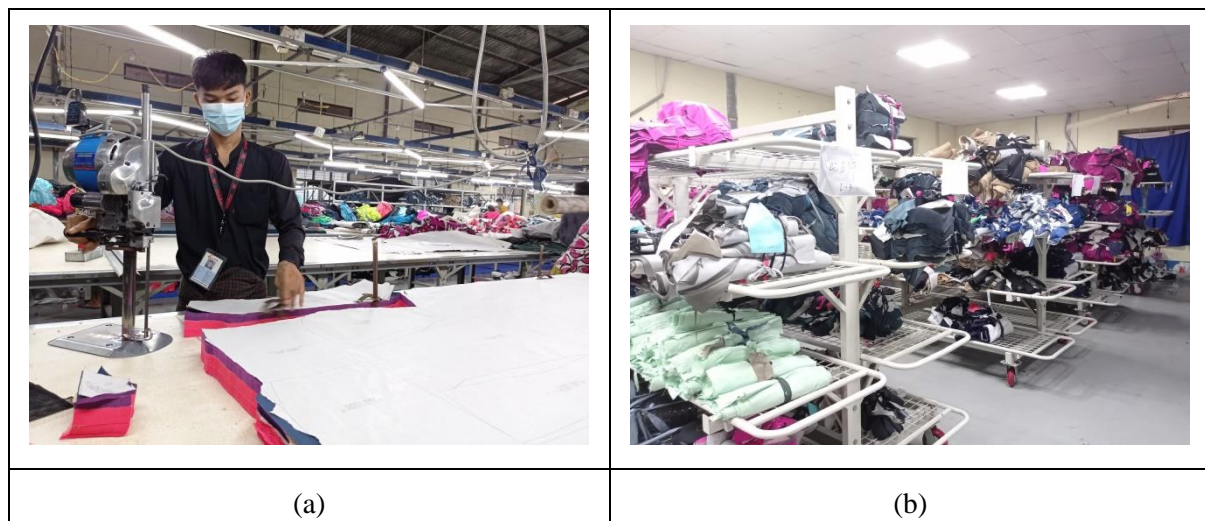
(a) Fabric cutting and (b) Sorting of cut fabric
